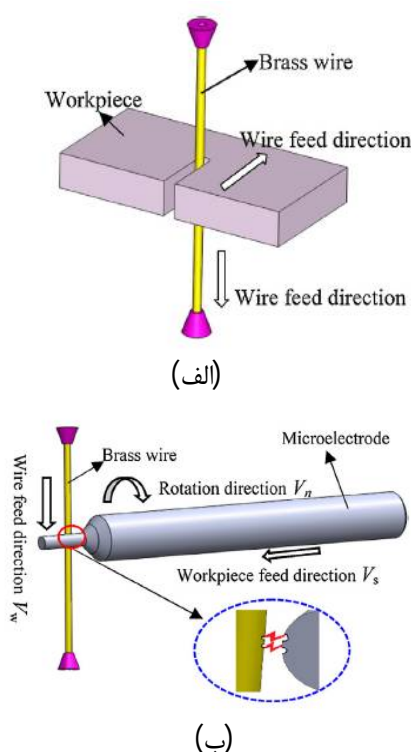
a) Wire cut machining and b) Cylindrical wire electrical discharge turning [6]
